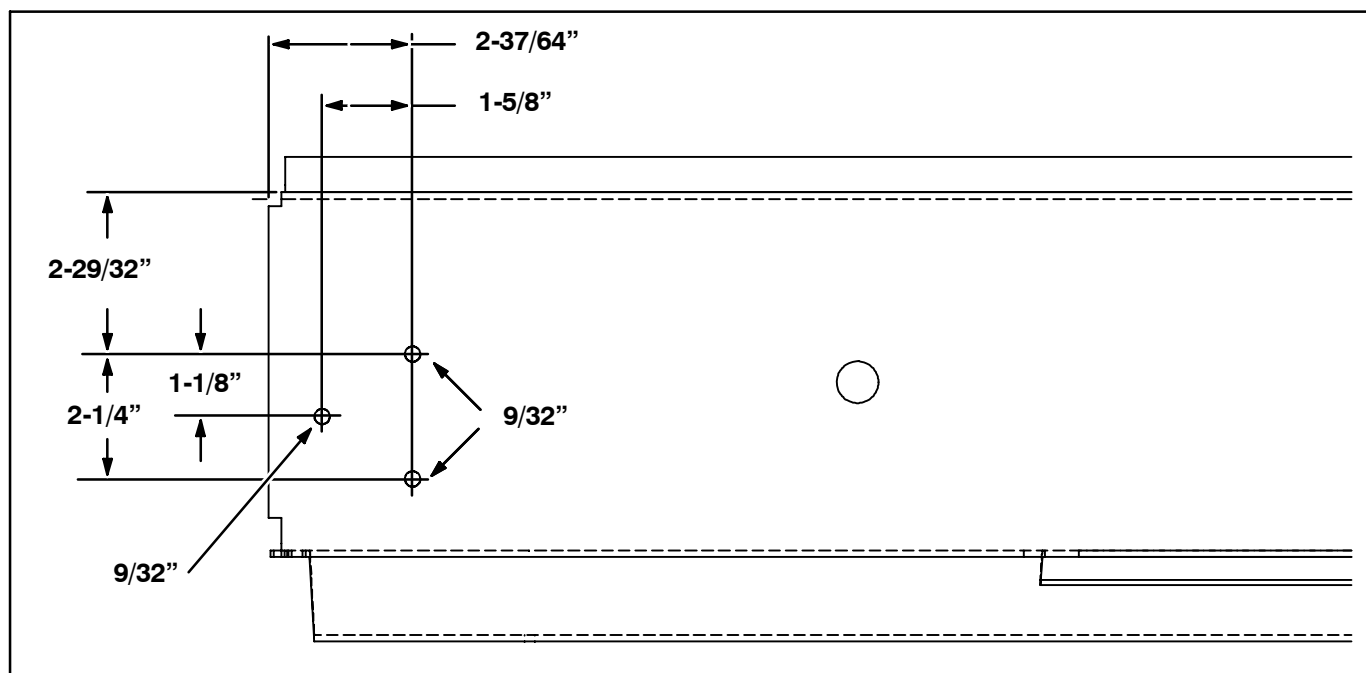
Hole Locations in Machines Without Overhead Guard or Cab
